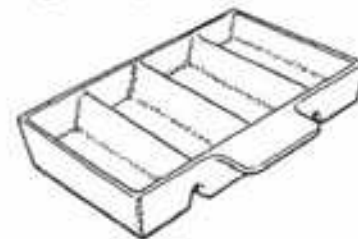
Cast iron ingot mould - each ingot will weigh about 250g
